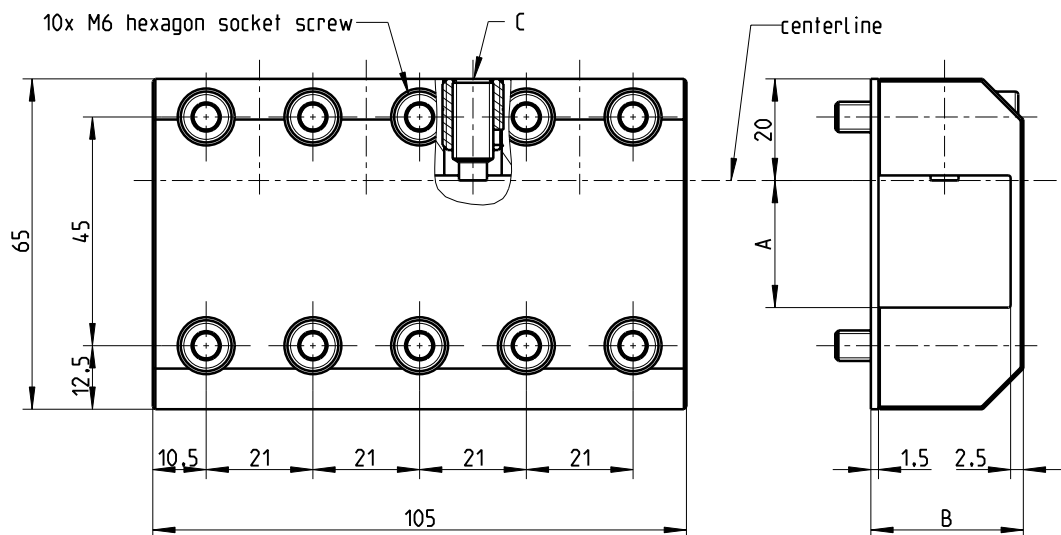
Tool holder for lathe chisel for axially mounted dynamometer, Type 9129AE...
